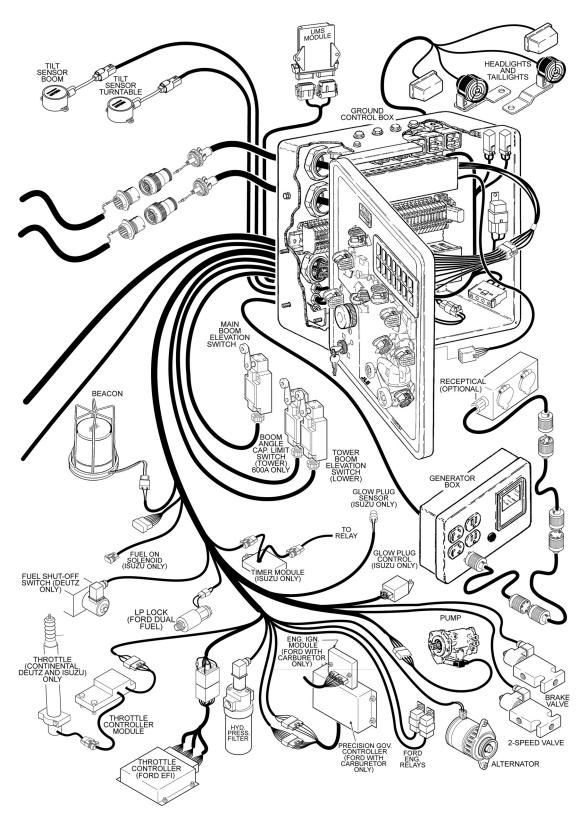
Electrical Components Installation (Prior to S/N 0300064432) - Sheet 2 of 2
